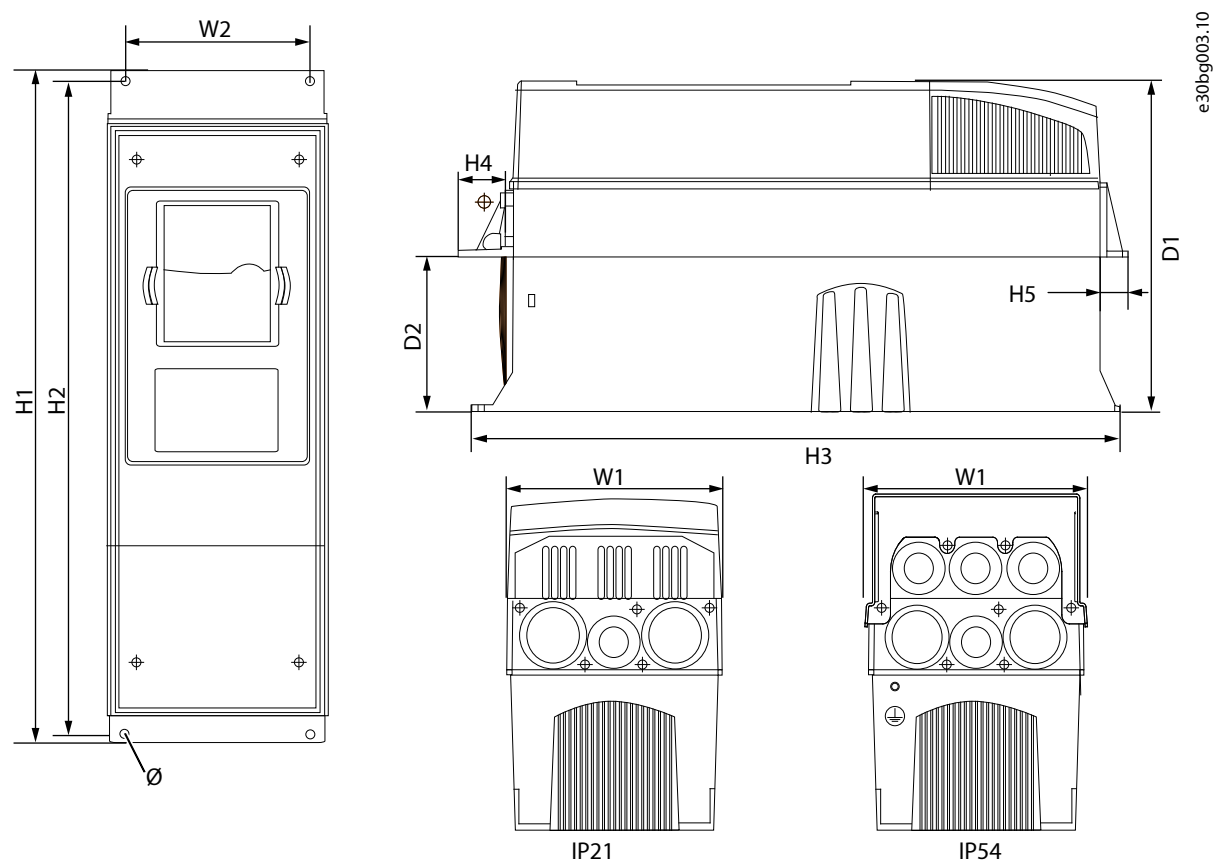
Dimensions of the VACON® NX Inverters with Flange, FI4–FI6
